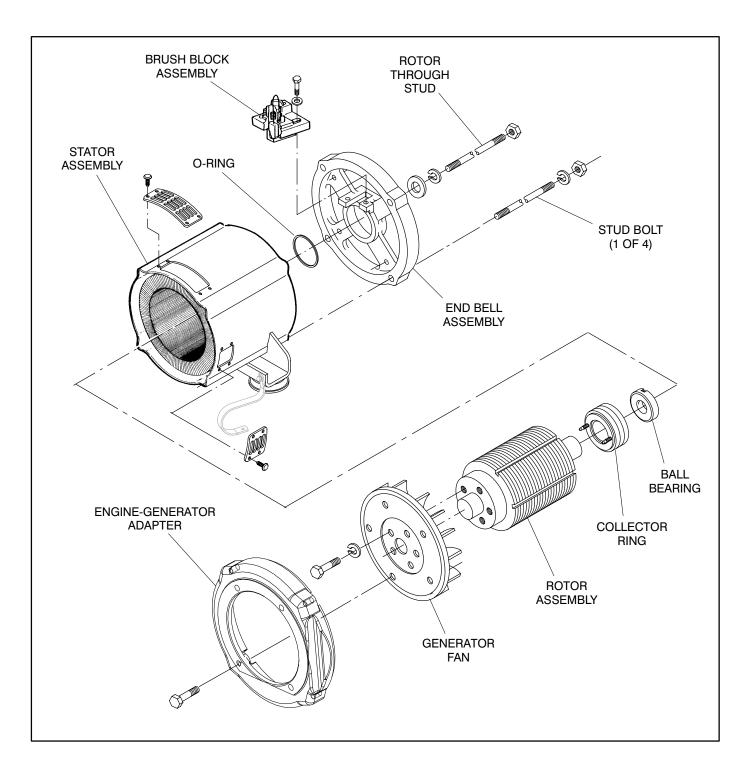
GENERATOR DISASSEMBLY/REASSEMBLY
